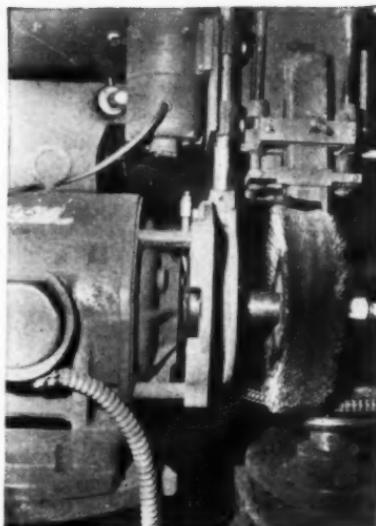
A close-up of the automatic gear brushing machine which removes burrs and avoids costly gear-grinding mistakes.
